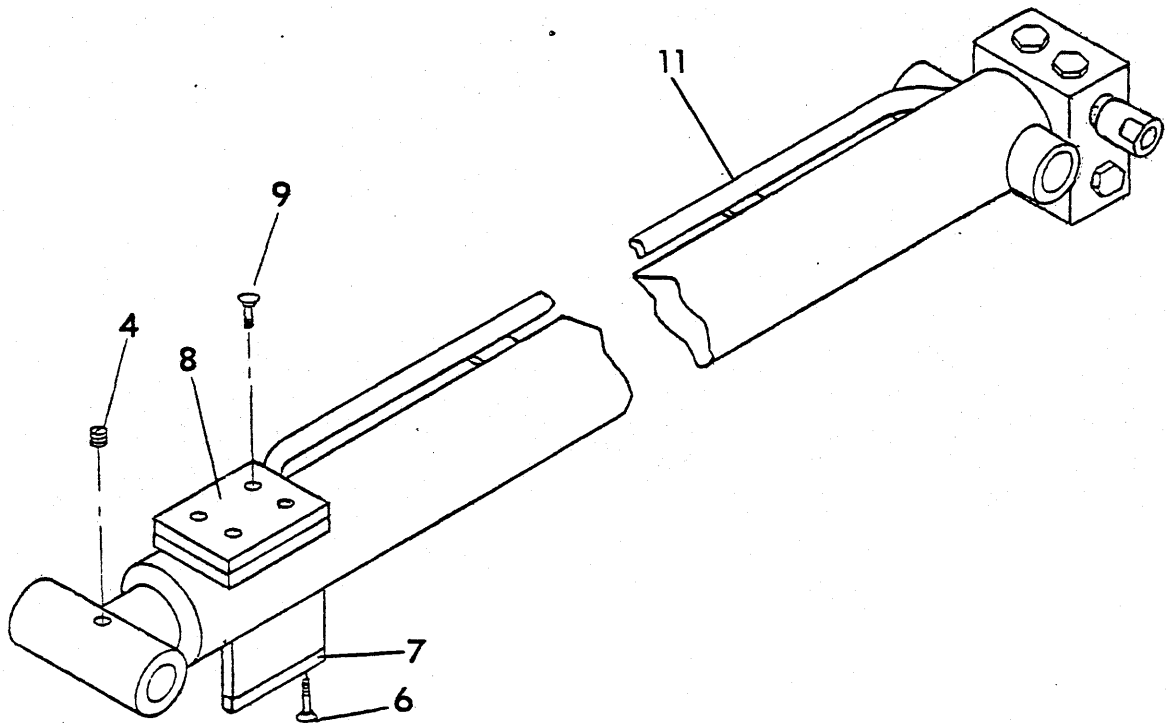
A BOOM EXT. CYLINDER PARTS BREAKDOWN (48)
